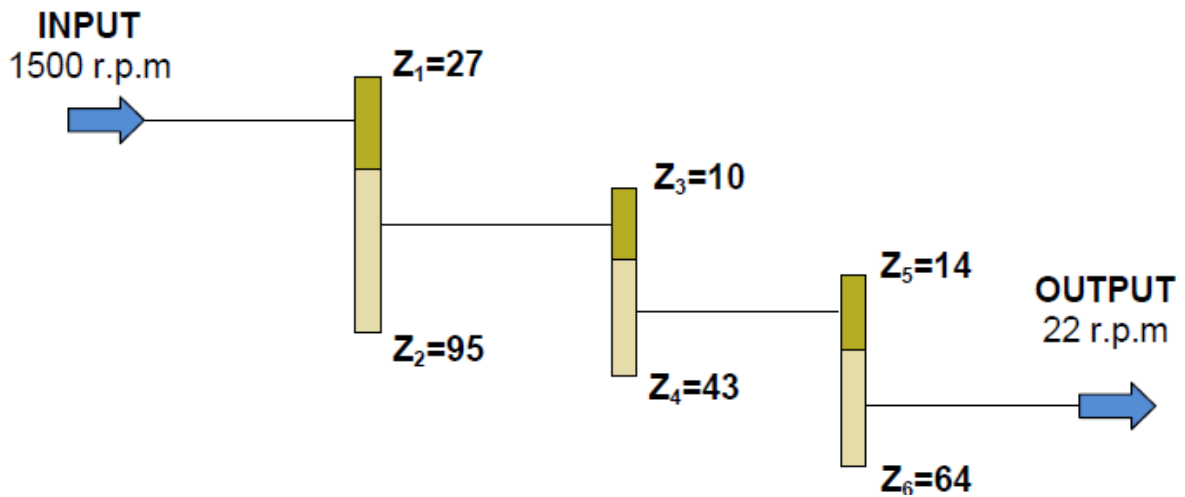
Gearbox test rig kinematics as provided by TWI and Brunel University.
